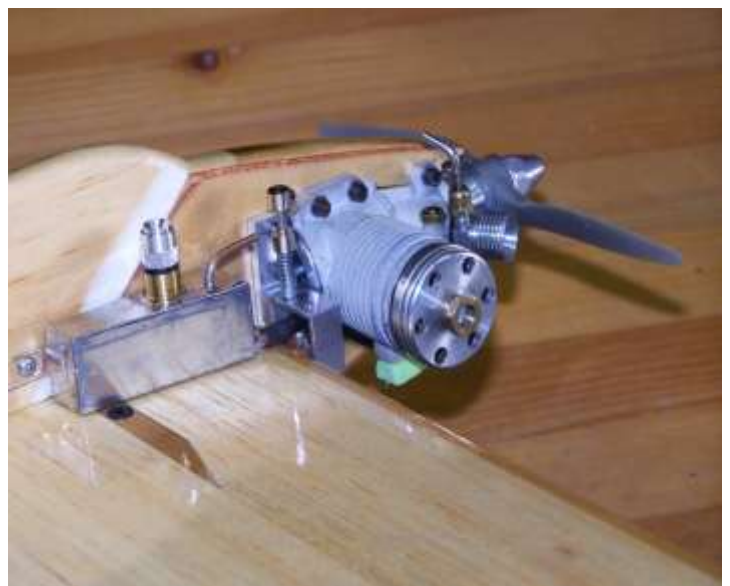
Installed shutoff as fitted to the airplane. Note that the position of the mounting screws in the bonded mounting plate allows assembly access. To avoid slipping of the mount on the fuselage with the offset screws, there is a 1/16" shear pin at about the level of the wing. A hole was drilled into the fuselage, which is hardwood at that location, for a press fit. The fuselage has threaded brass inserts for the screws.
